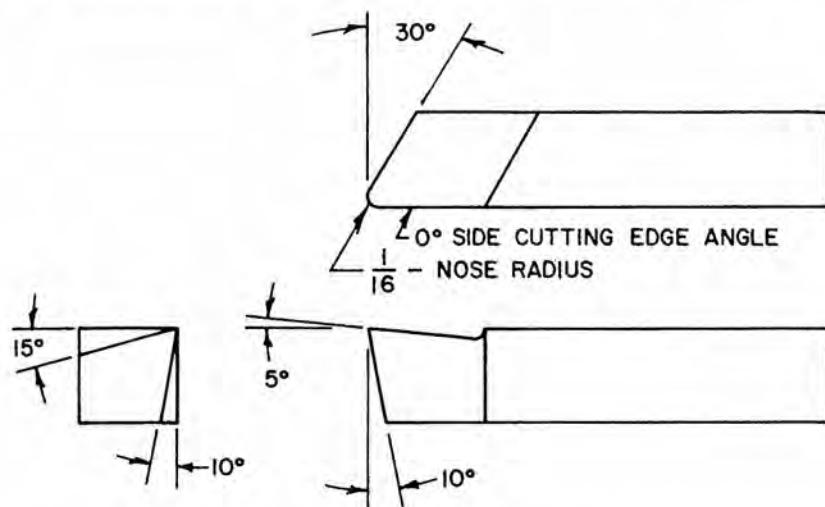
General-purpose, high-speed steel turning tool. The sequence of grinding this tool is shown in Fig. 7-18.
